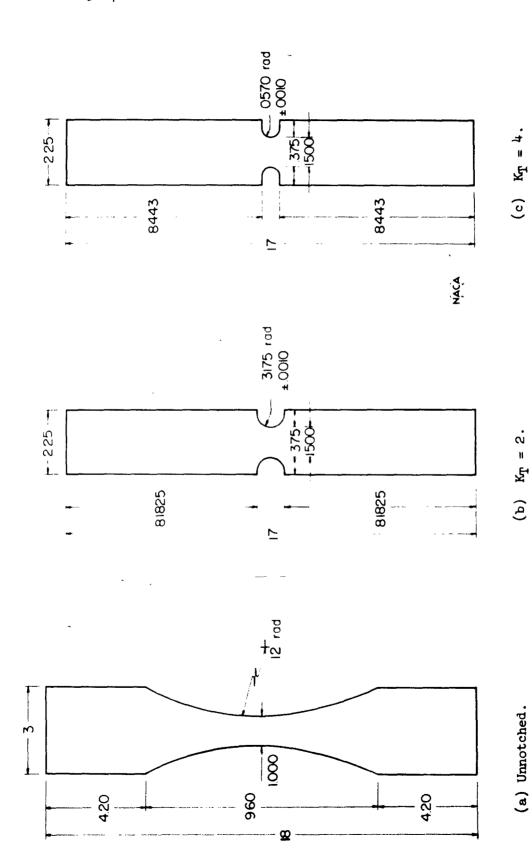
Specimen configurations. (All dimensions are in inches.)
